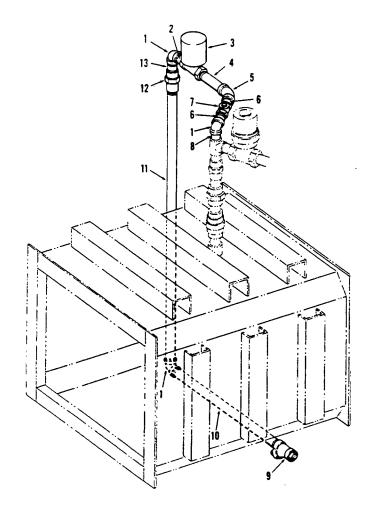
DEIONIZED WATER SUPPLY PIPING ASSEMBLY.
